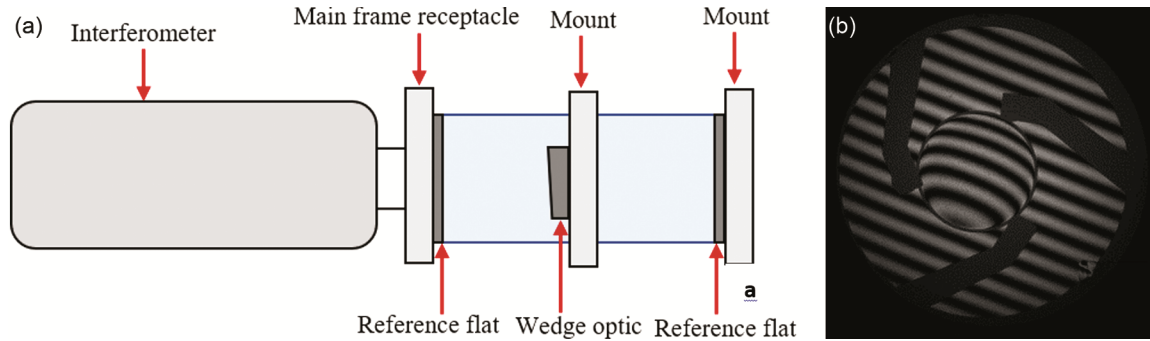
(a) Parallelism measurement setup and (b) Interference pattern for parallelism measurement.
